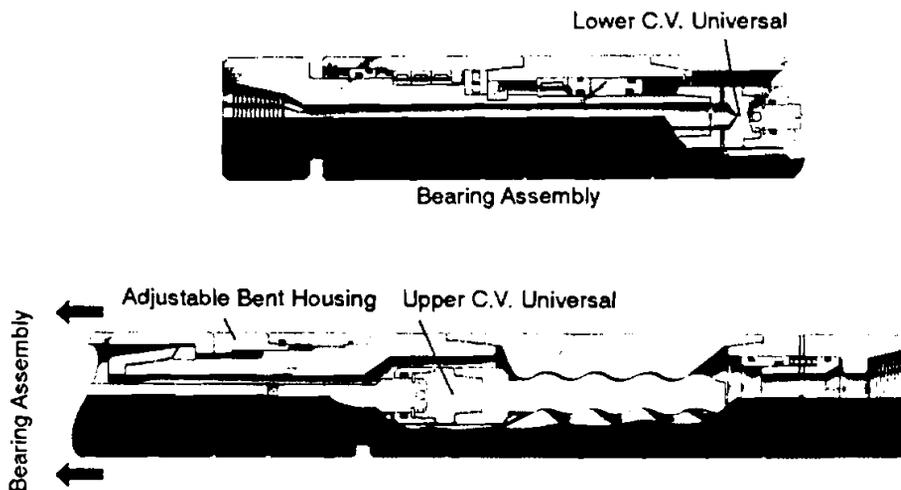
Slim Motor with Sealed-in-Oil Bearings (*American Oil & Gas Reporter Staff*, 1992)
